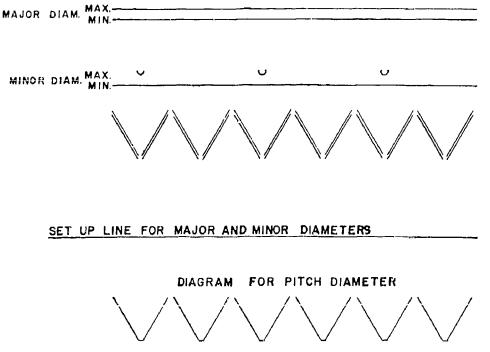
Suggested chart for projection inspection of external National Miniature threads.
